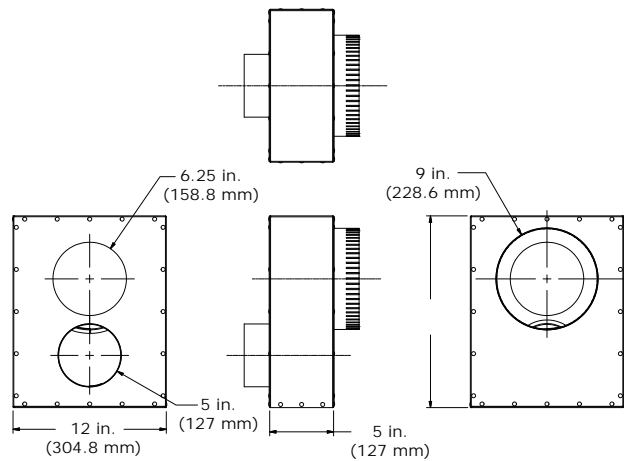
Combustion air inlet box dimensions (drawing D9015C)
